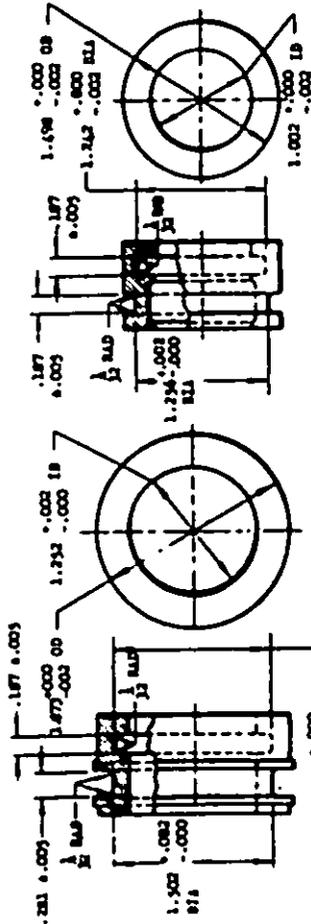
(sheet 1 of 2).--Tools and method for inspection of V-ring diameter
